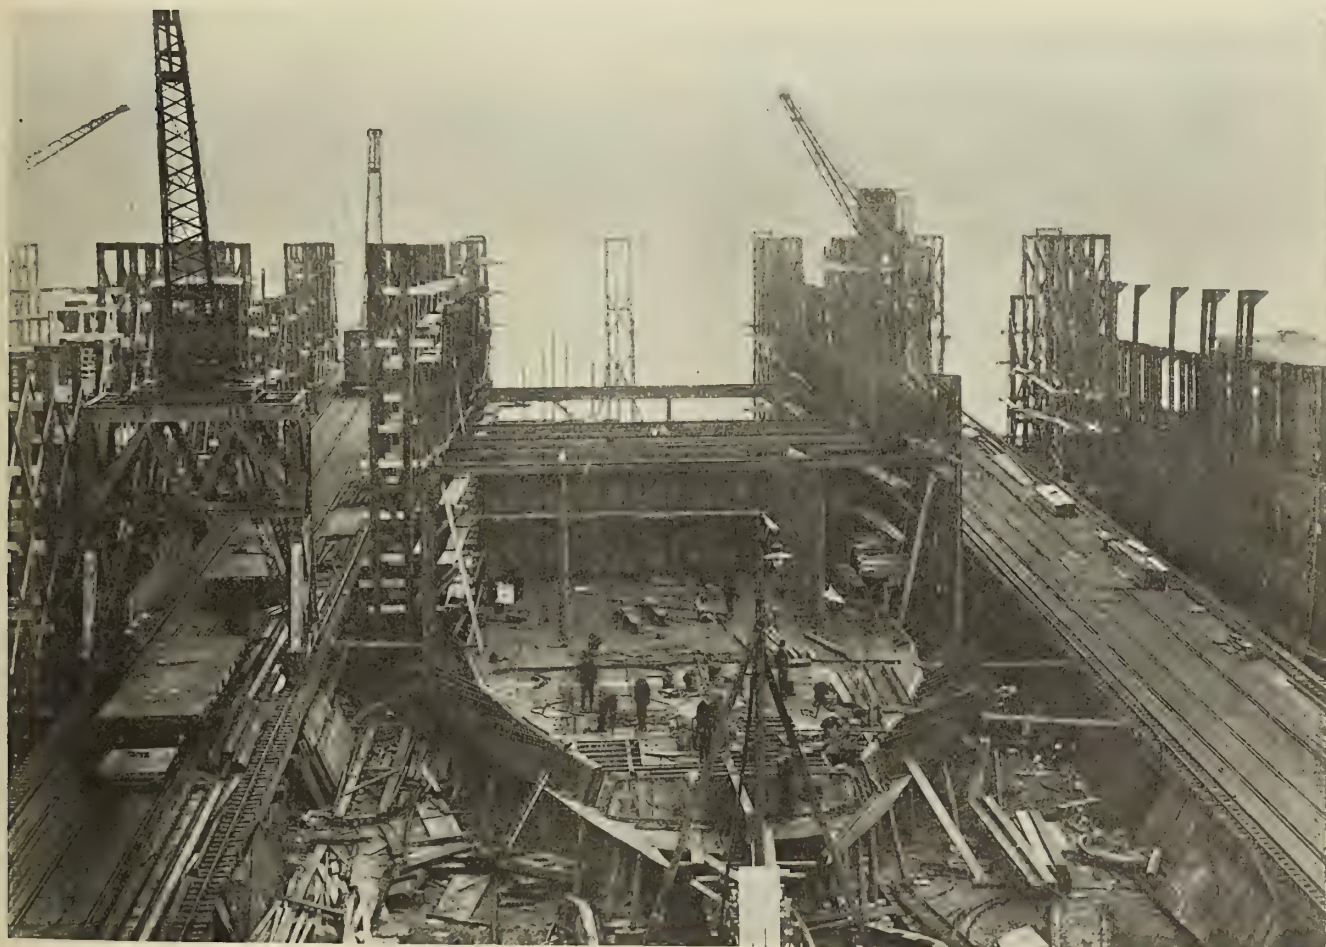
View of Shipway, Showing Portable Tower Cranes for Handling Material
